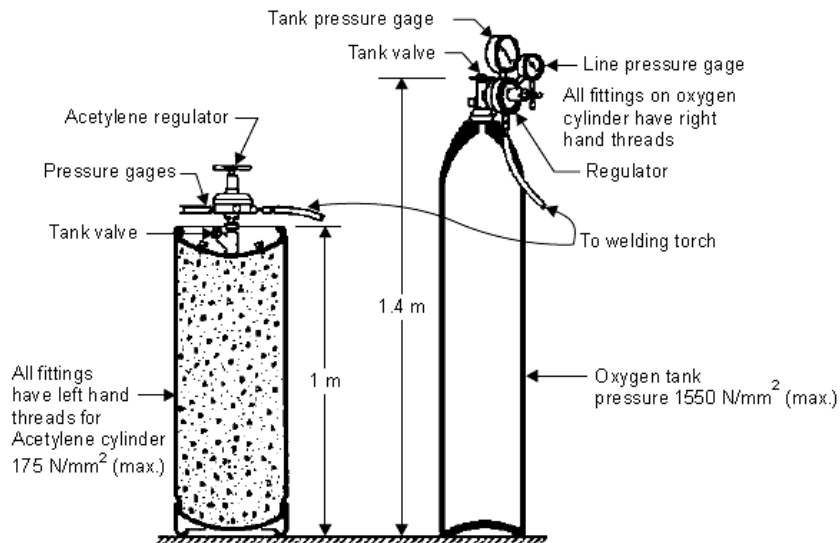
Cylinders and regulators for oxyacetylene welding [1]
